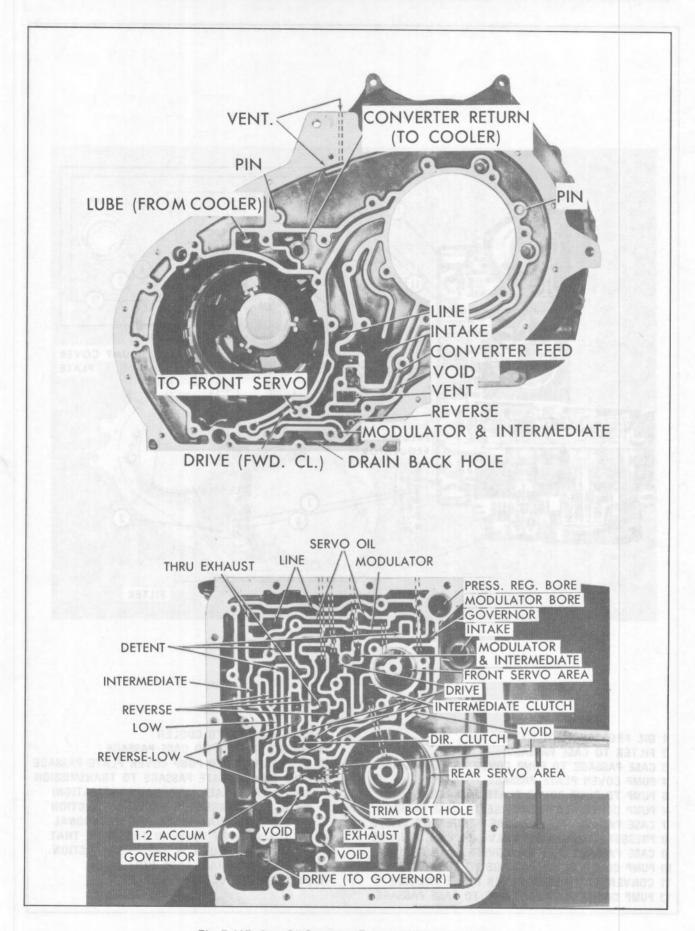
Case Oil Passages-Front and Bottom Views
